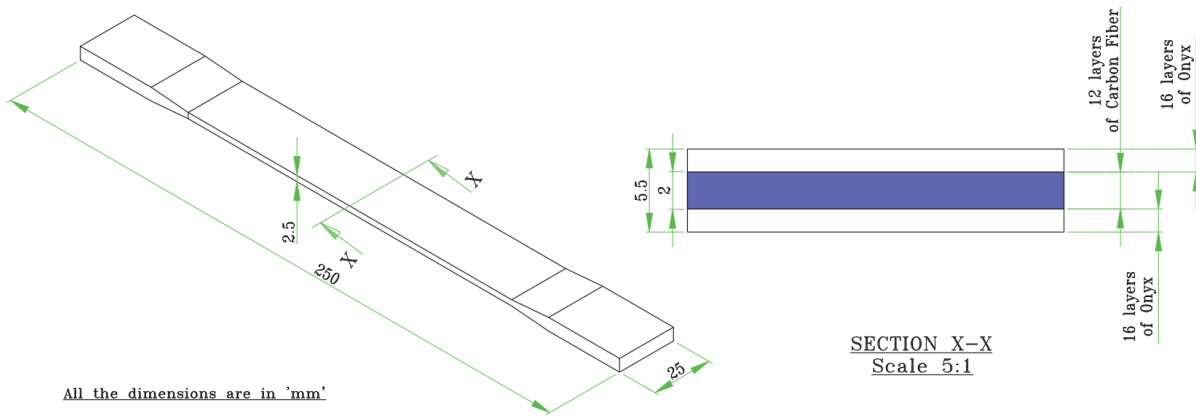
Dimensions of tensile specimen and sectional view to illustrate the fiber and matrix layers
